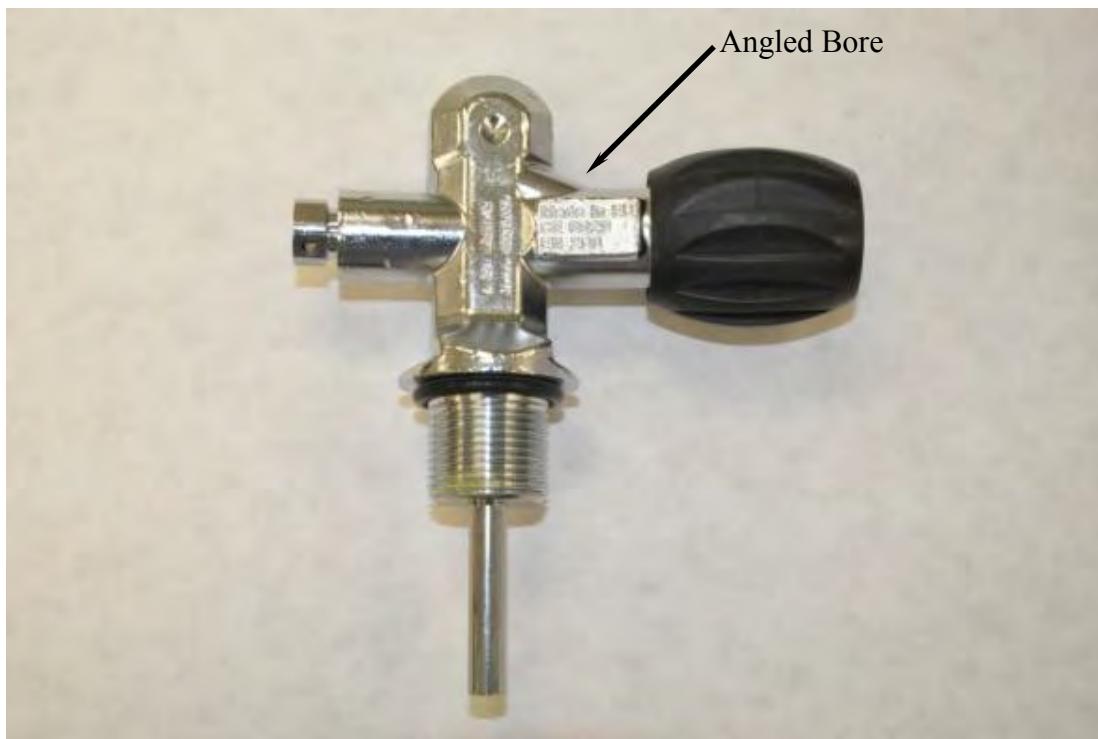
Rear view of the assembled exemplar cylinder valve showing the angled bore housing that connects the high pressure regulator port to the valve system assembly chamber.
